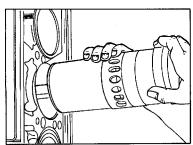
Cylinder Liner Seal Ring Location in Cylinder Block Bore
